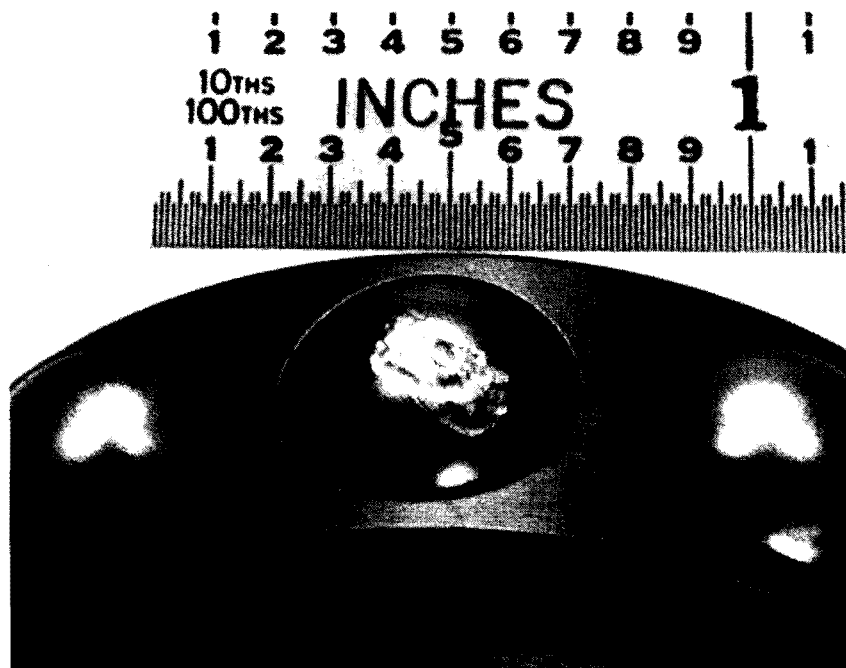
90-Degree Gearbox -143 Bearing Ball Fault C/D,
